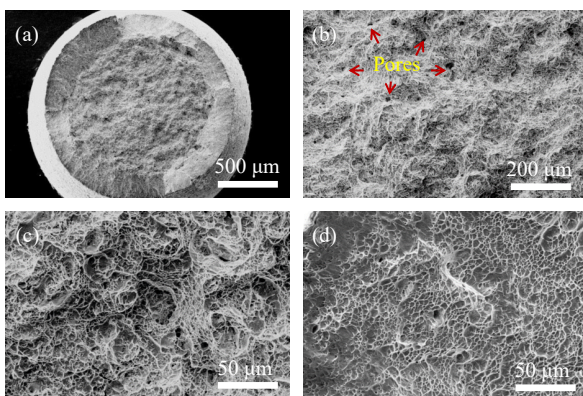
Tensile fracture morphologies of the 930°C specimen: (a) overall fracture morphology; (b) rough surface of fiber zone; (c) holes distribution in the fiber area; (d) dimples in shear lip zone.
